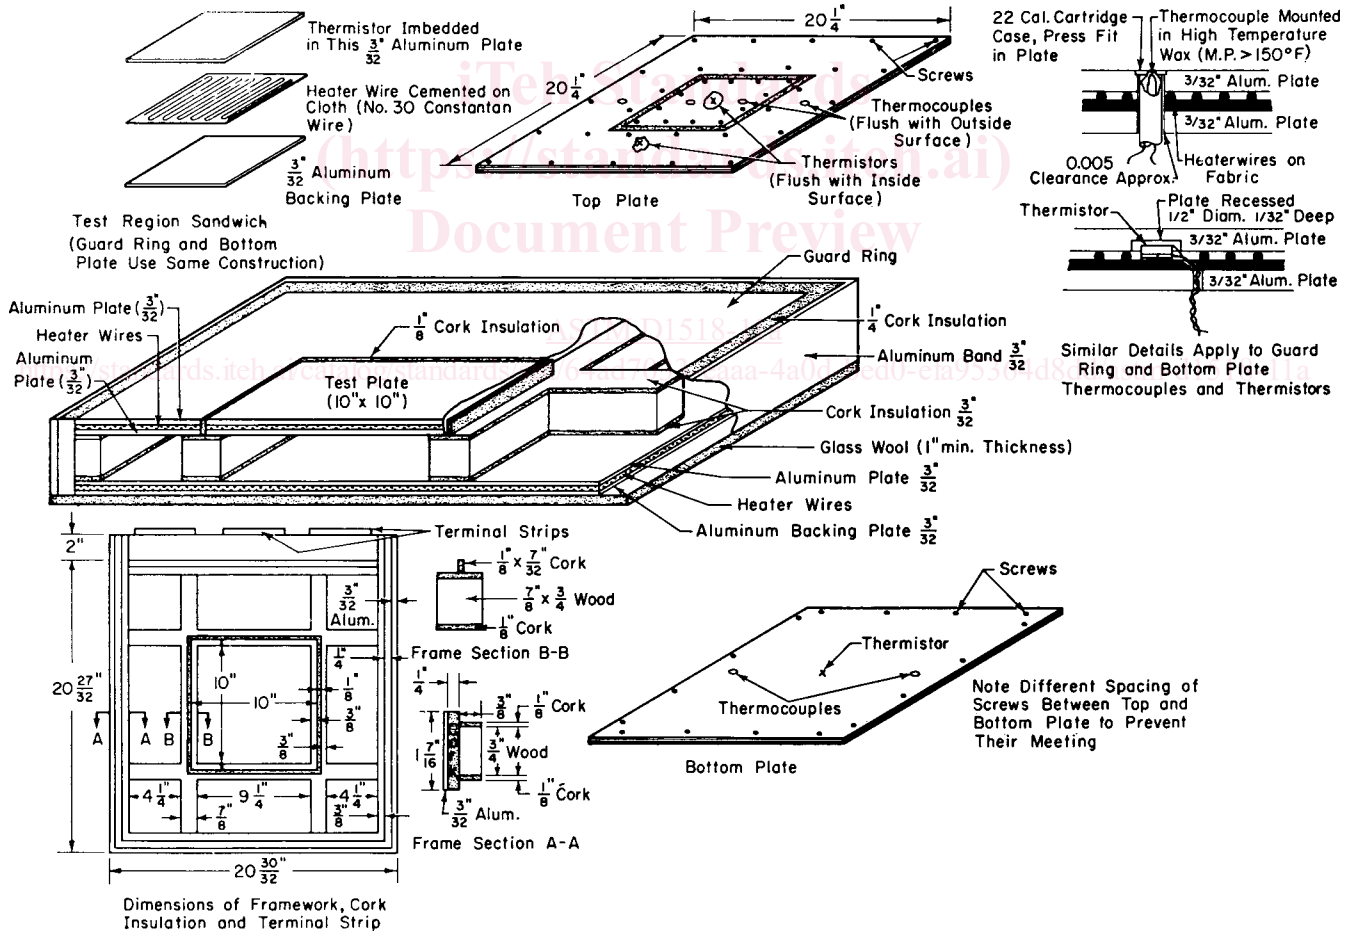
Hot Plate Apparatus, Showing Dimensions
